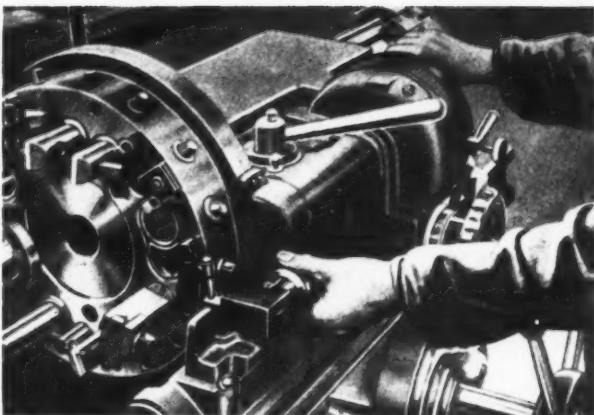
Method of Employing Precision Cross-feed Stop Located Outside Tool-hole Circle
